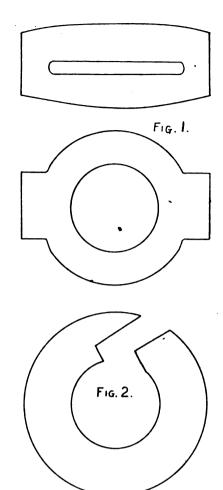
AND 2.—FORGING RINGS AND LARGE NUTS
